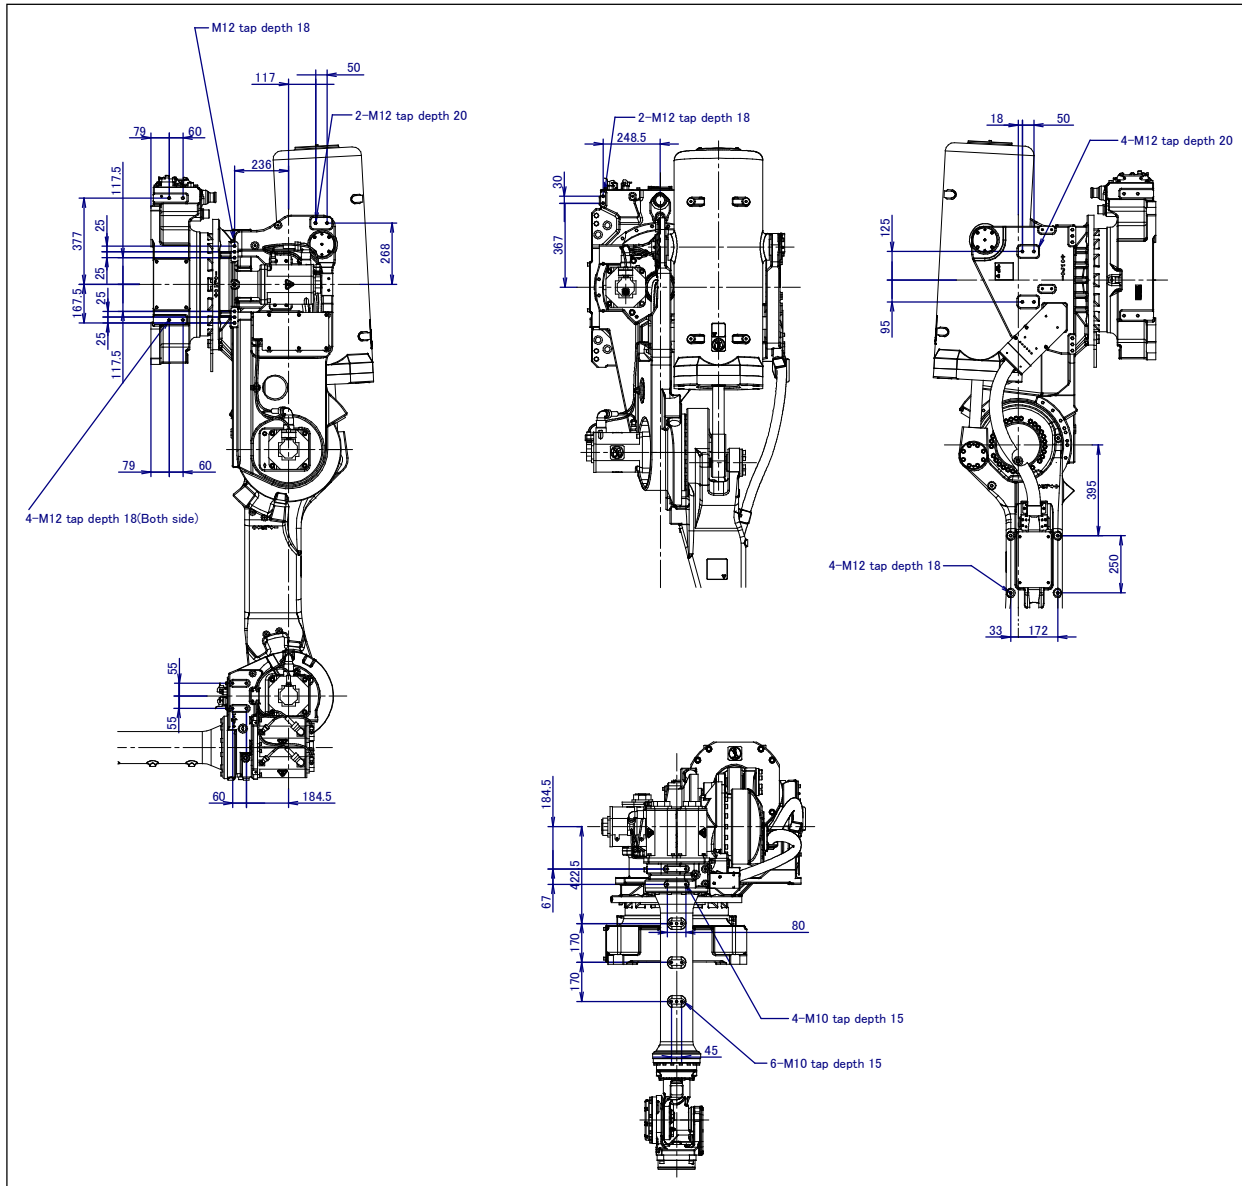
(c) Equipment mounting faces (R-2000iB/165R)
